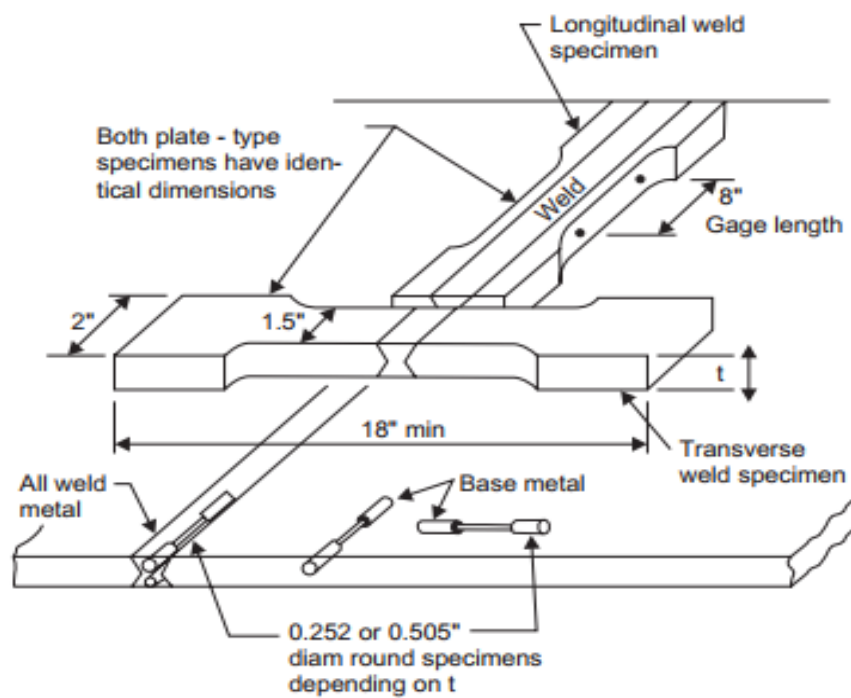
Typical test specimens for evaluation of welded joints (Khan, 2007)
